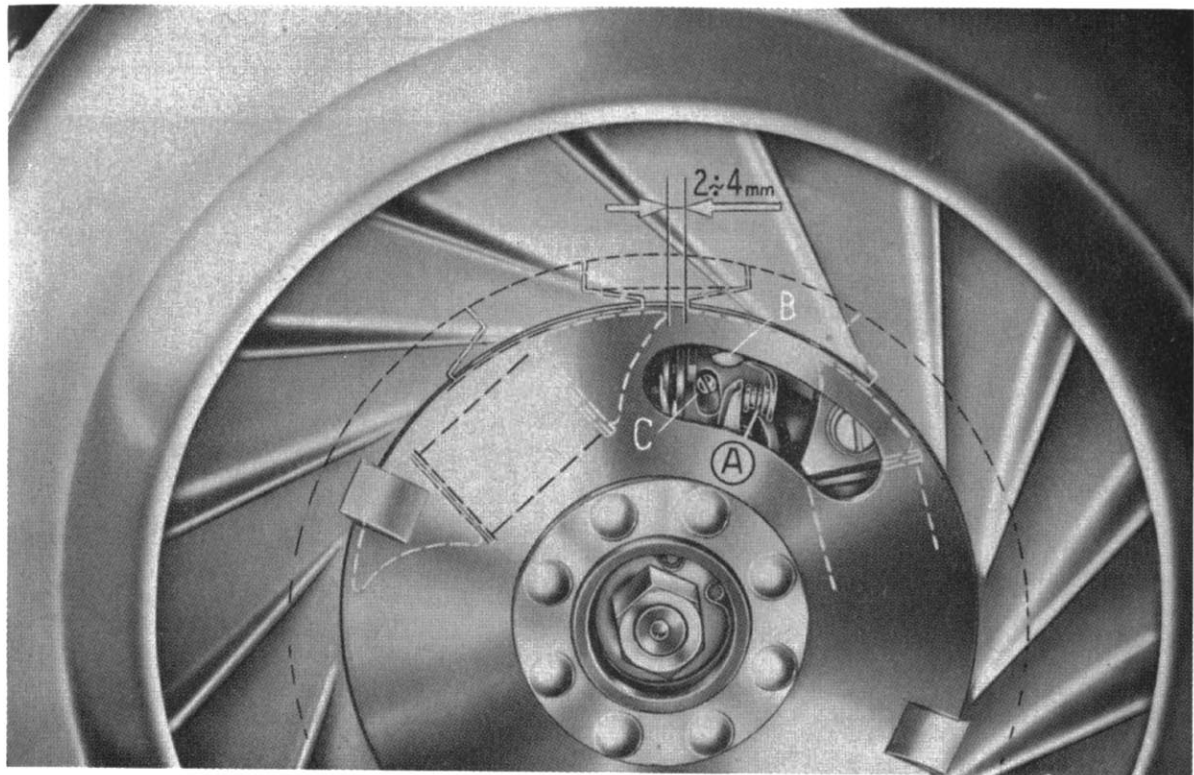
Operations for checking the “magnetic” timing of the flywheel
